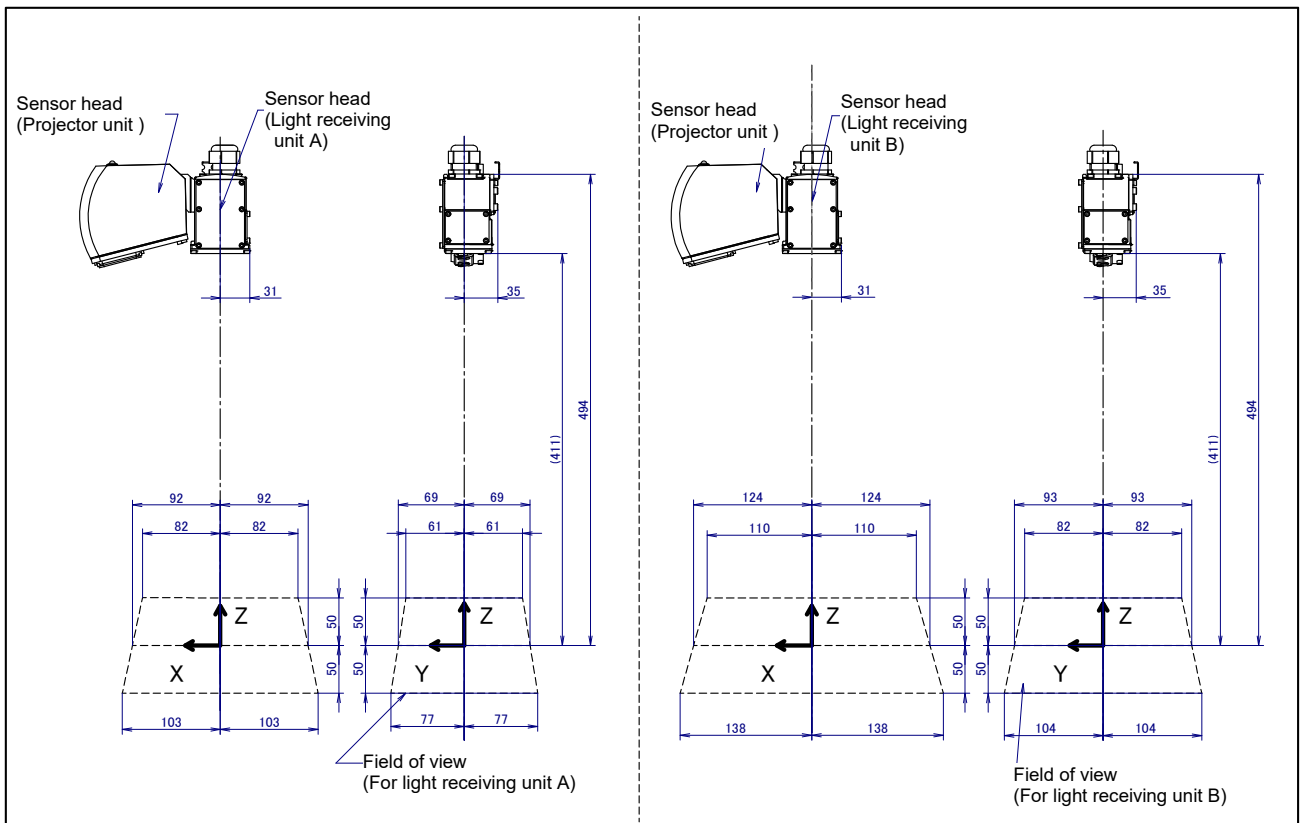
(e) Vision range of the 3D laser vision sensor (stand off 400mm)
